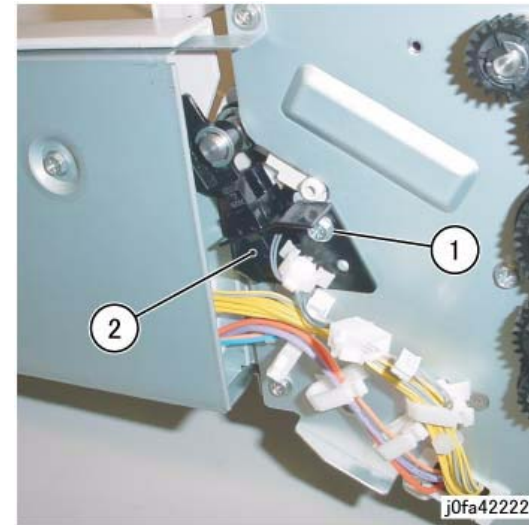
Removing the Set Clamp Home Sensor Assembly (j0fa42222)
